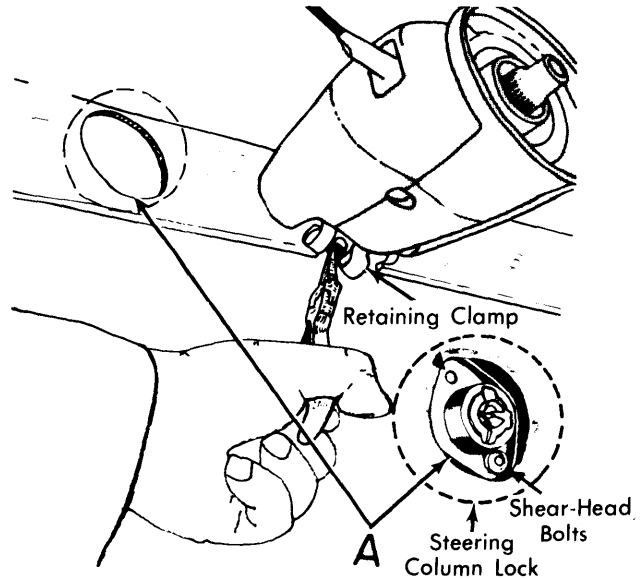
Dismantling Upper Column Assembly 911 and 912/E Models
